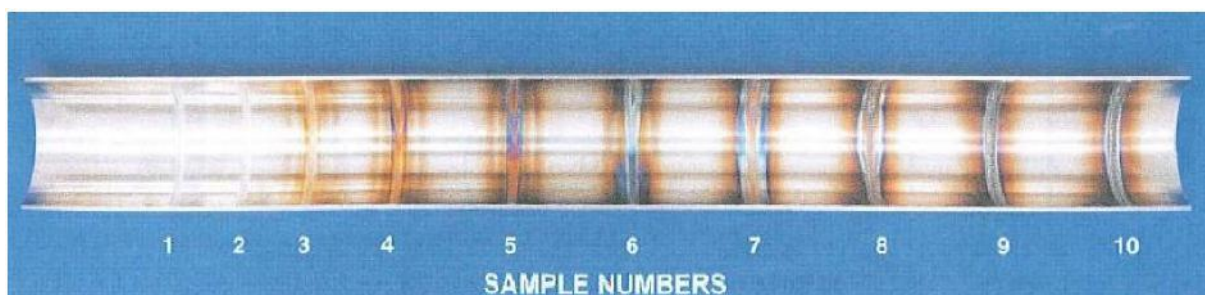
Weld discolouration levels inside 316L stainless steel (AS 1554.6)
